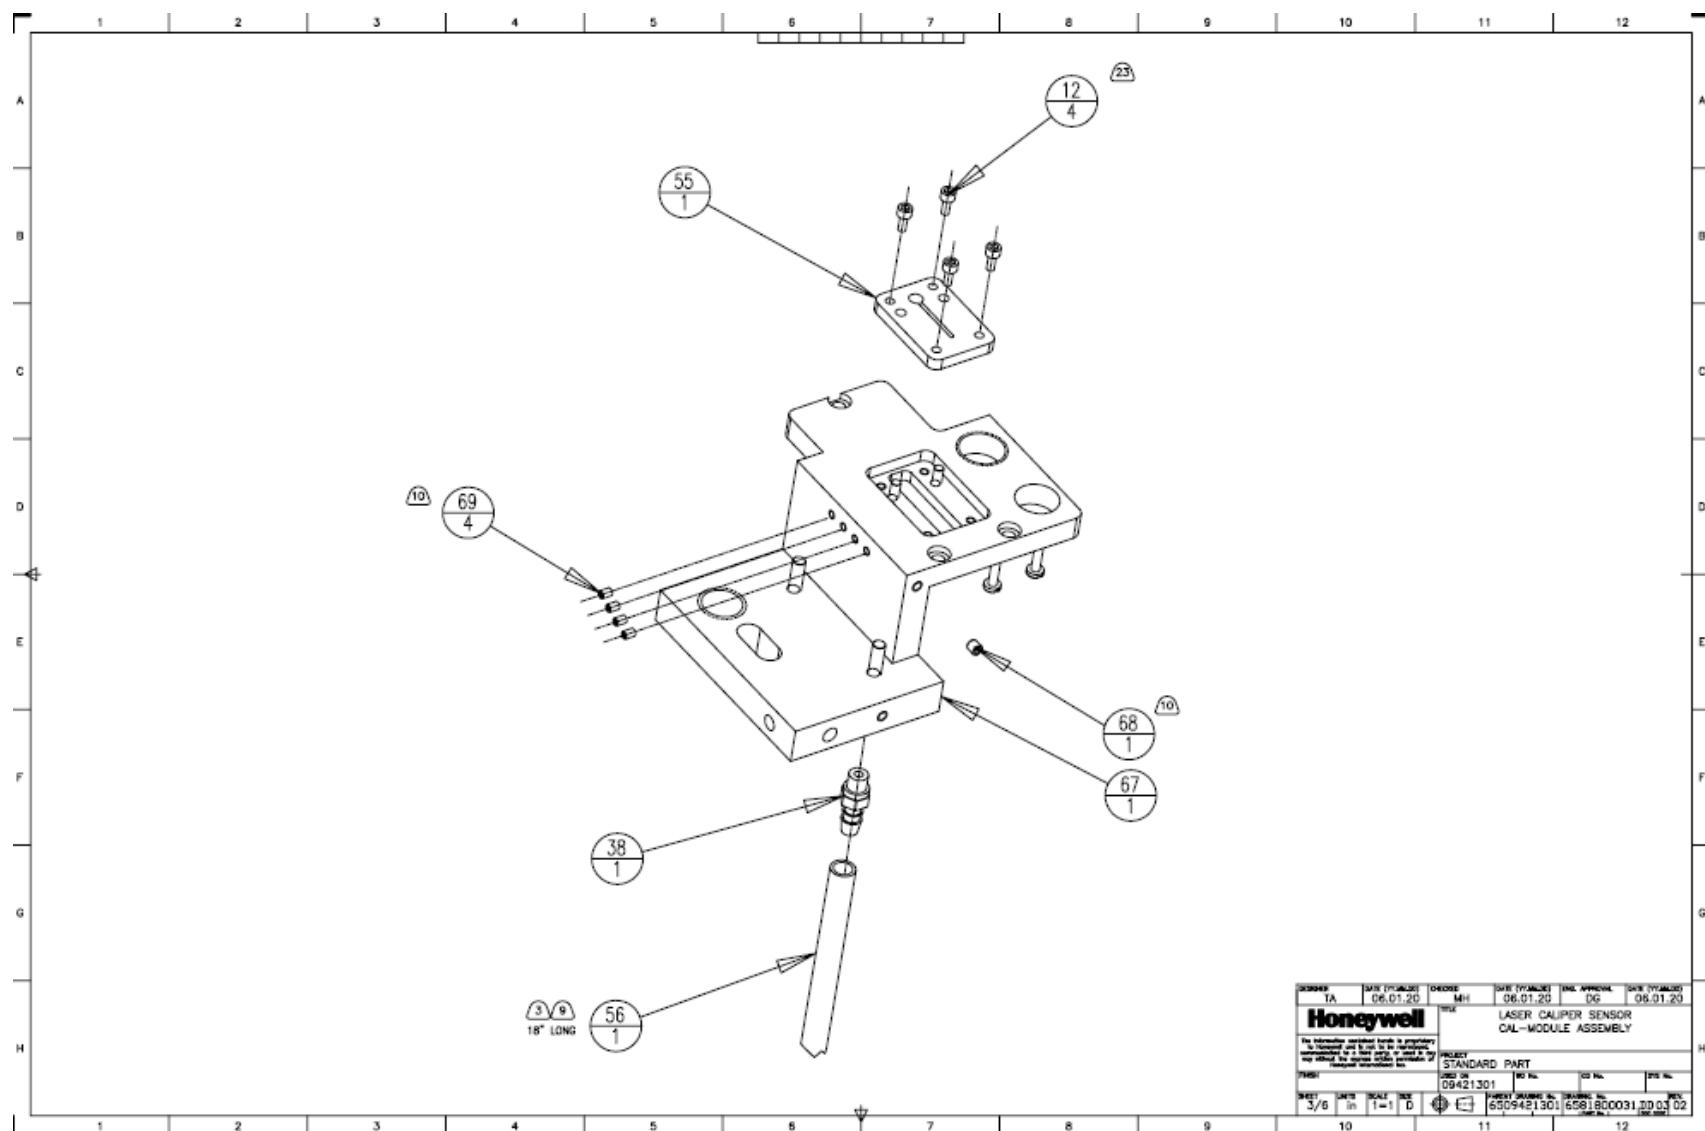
6581800031: laser caliper sensor cal-module assembly (3/6)
